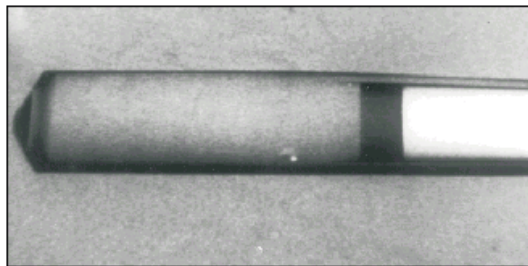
Tungsten inclusion in FBTR fuel pin end plug weld (SS - TIG weld)
